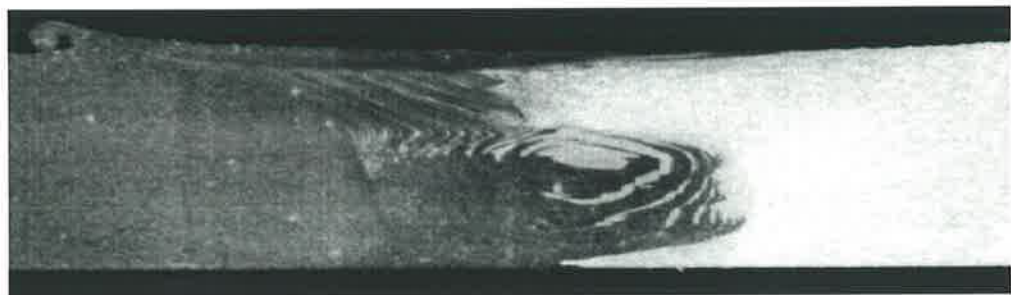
Welding of 5083 and 6082 [75]
